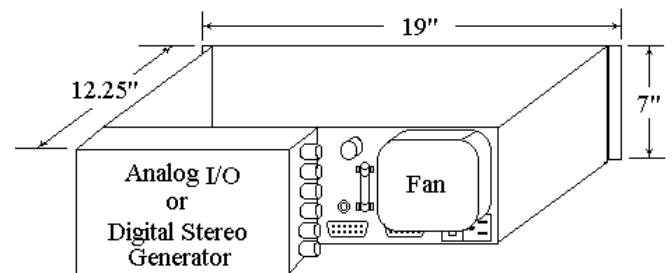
DIGIT™ Exciter Mechanical Dimensions
